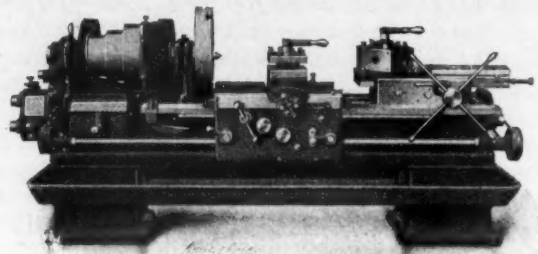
20-IN. LATHE WITH FRICTION HEAD AND TURRET.
